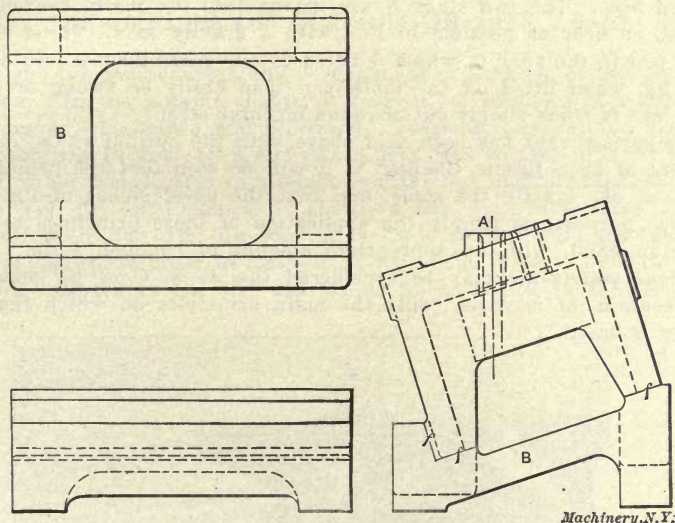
Jig and Stand for Drilling Holes at an Angle
